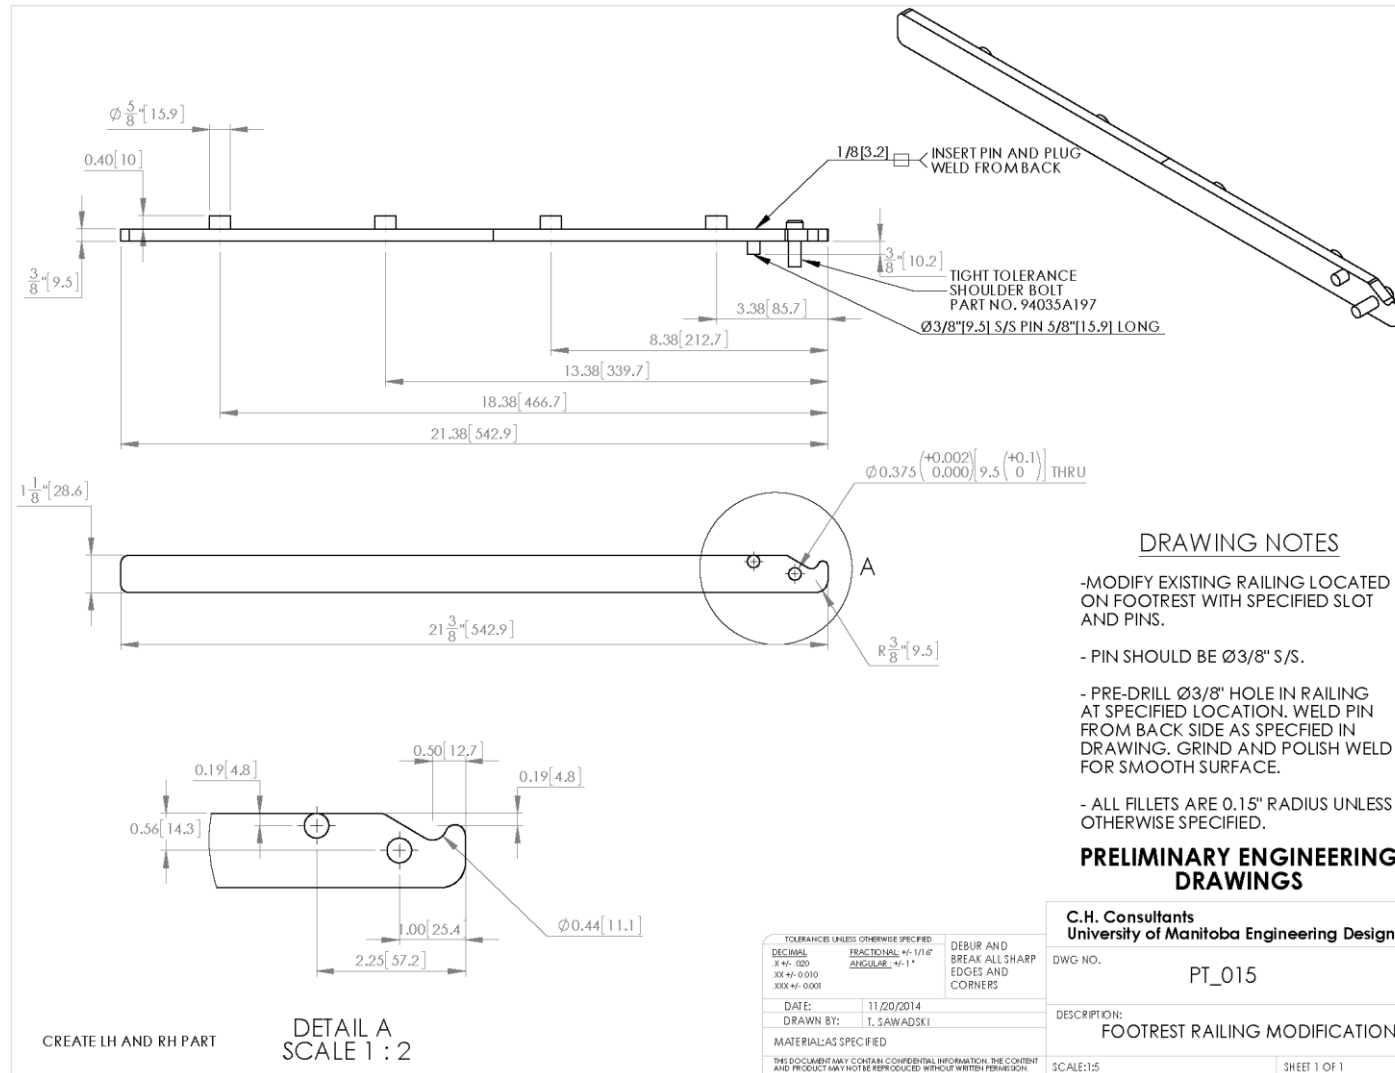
Preliminary engineering drawing for modifications to the footrest railings
